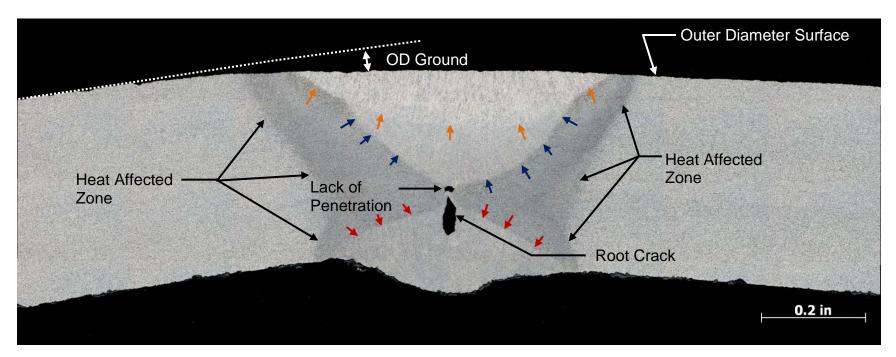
Etched metallographic cross section of the longitudinal seam in pup 4 taken 8 inch south of girth weld C5. The microstructure of the weld was consistent with a multi-pass fusion welding process along the outer diameter surface of the seam and a fusion welding process along the inner diameter surface of the seam. Blue arrows – weld pool boundary from first pass along outer diameter surface. Orange arrows – weld pool boundary from second pass along outer diameter surface. Red arrows – weld pool boundary from pass along inner diameter surface.
